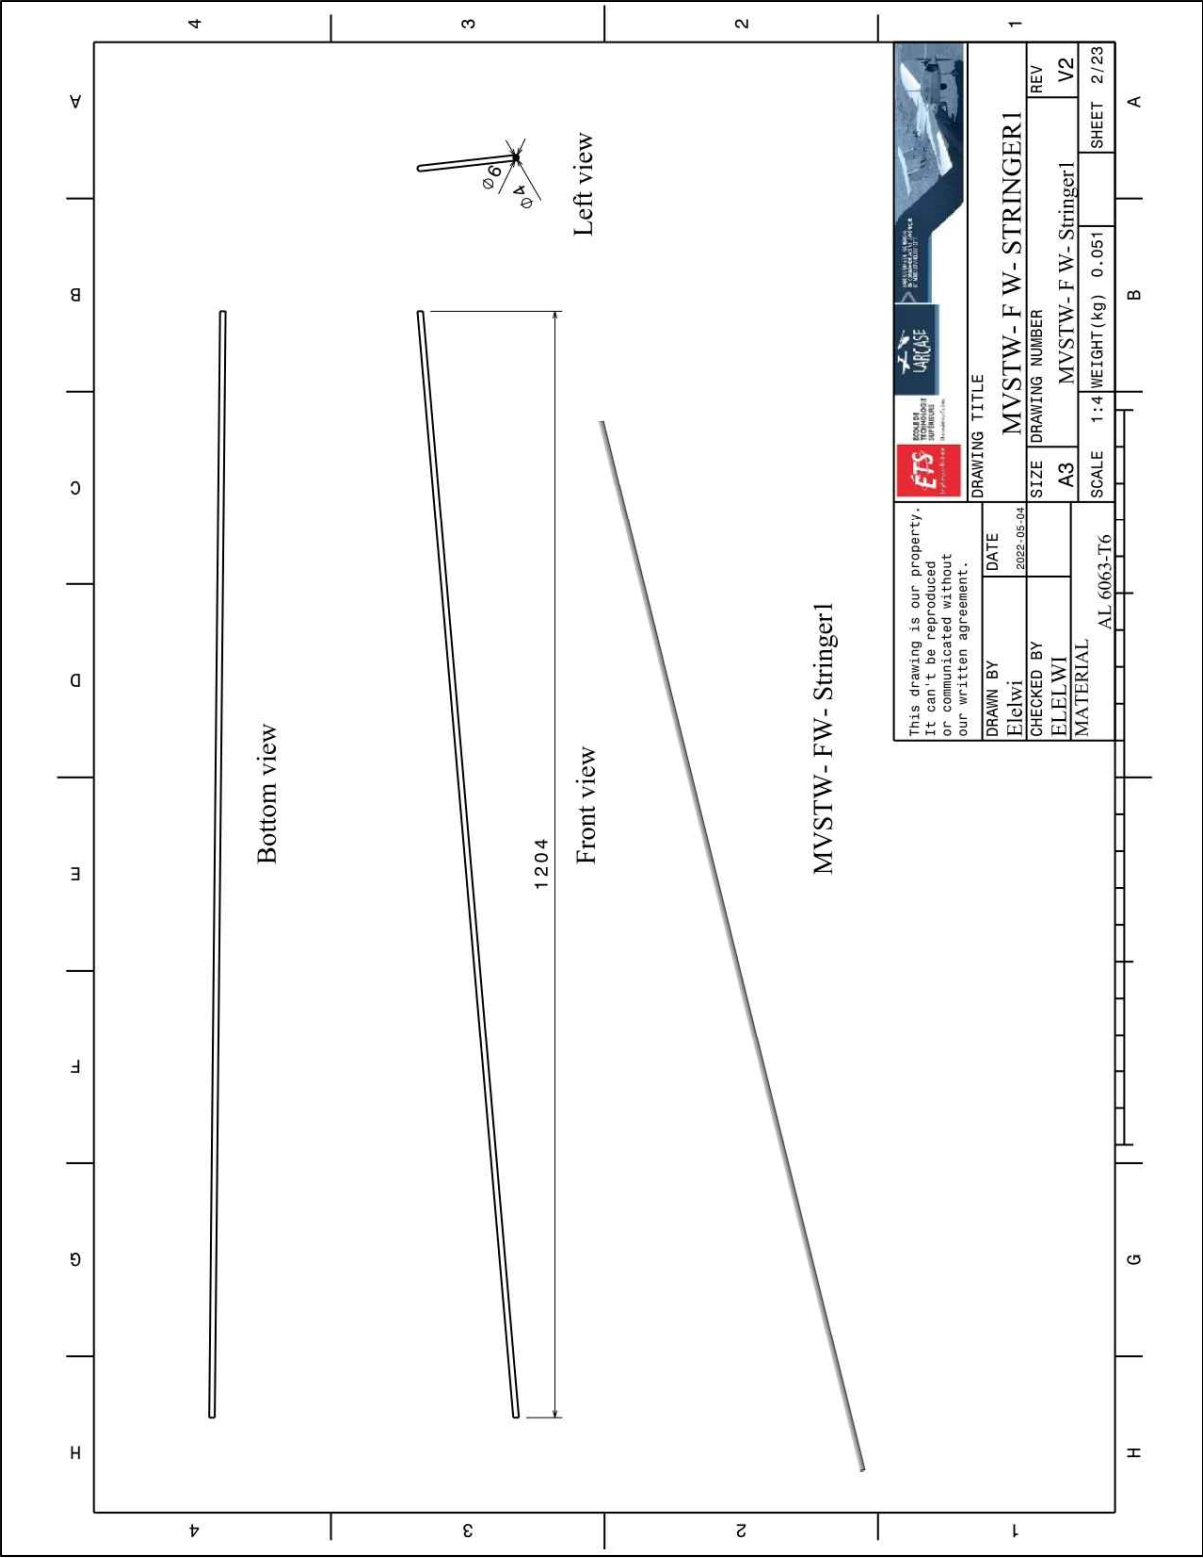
MVSTW Fixed Wing Stringer1 Using Al 6063-T6
